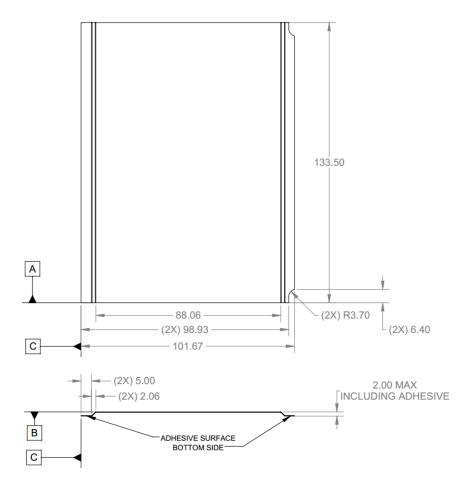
Large Card Bottom Side Insulator (Top and Side View)
